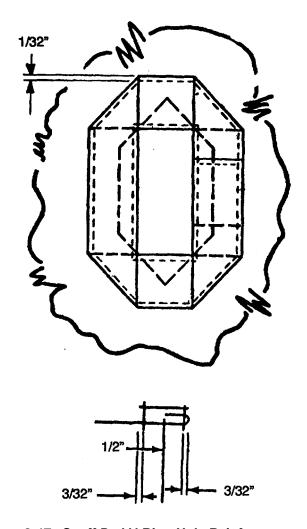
Scuff Pad V-Ring Hole Reinforcement Details
